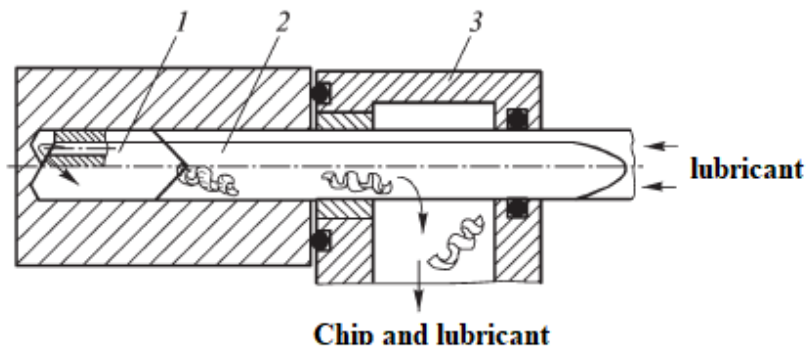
scheme for processing a deep hole with a gun drill:
